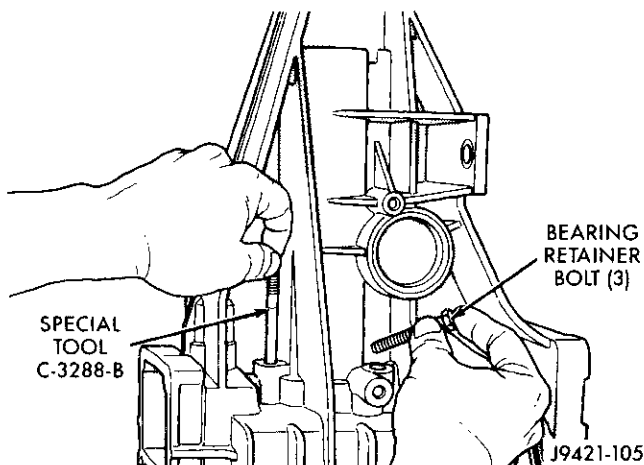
Removing Pilot Stud Tool And Installing Retainer Bolts—2WD
